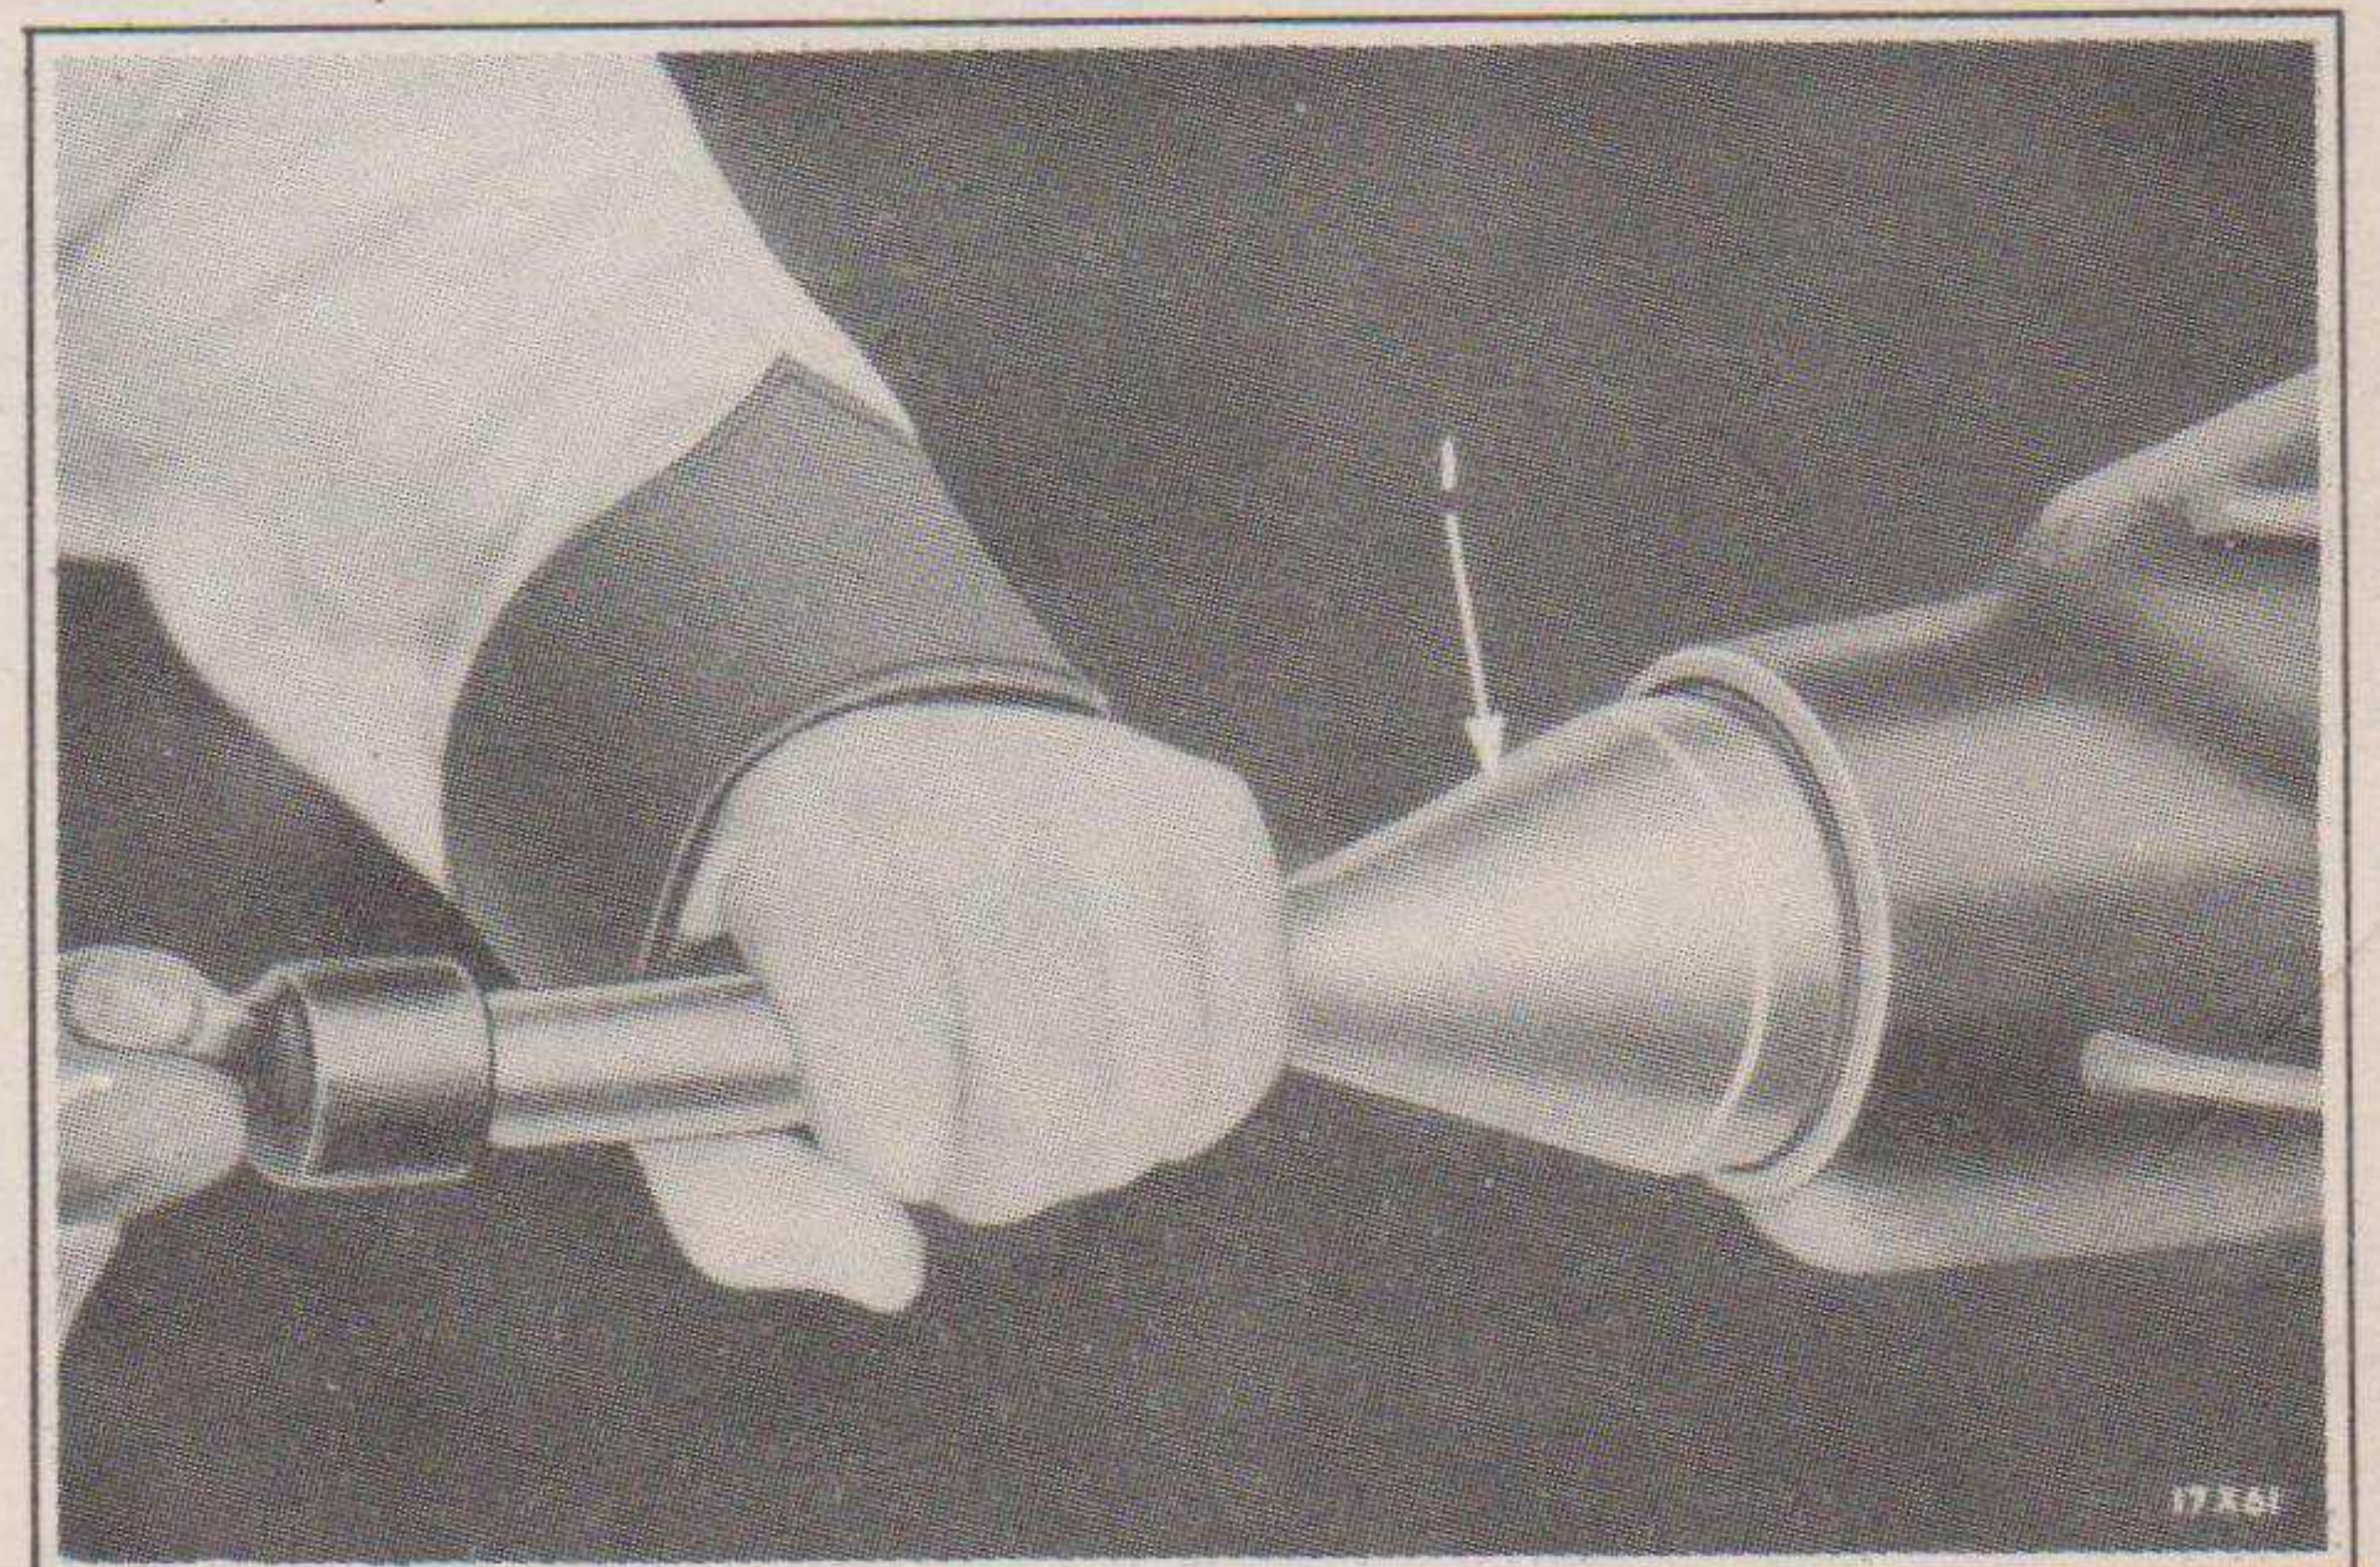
Installing Drive Pinion Bearing Oil Seal with Tool C-359
